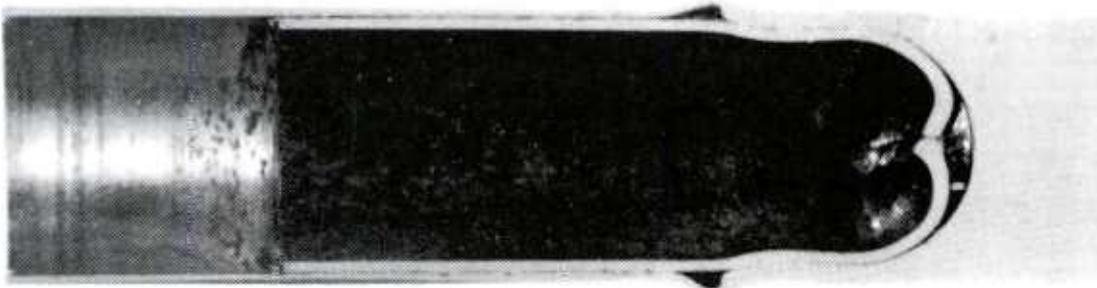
Photographs of Failed Single-Wall Projectiles.
